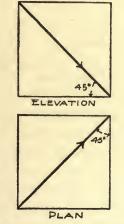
Elevation and Plan of Cube of Fig. 26.
